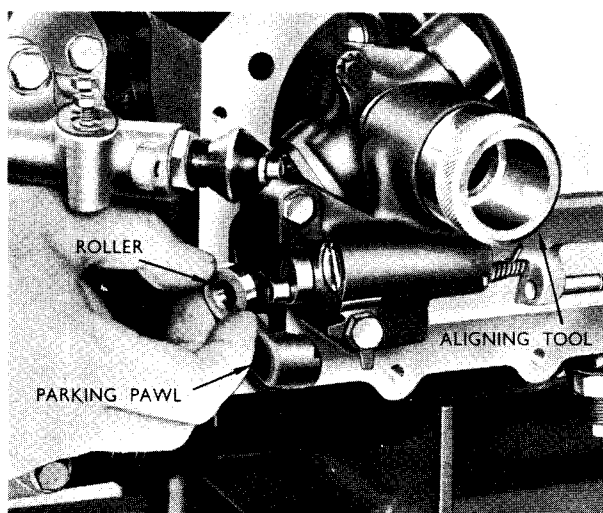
Parking pawl roller and governor sleeve aligning tool
